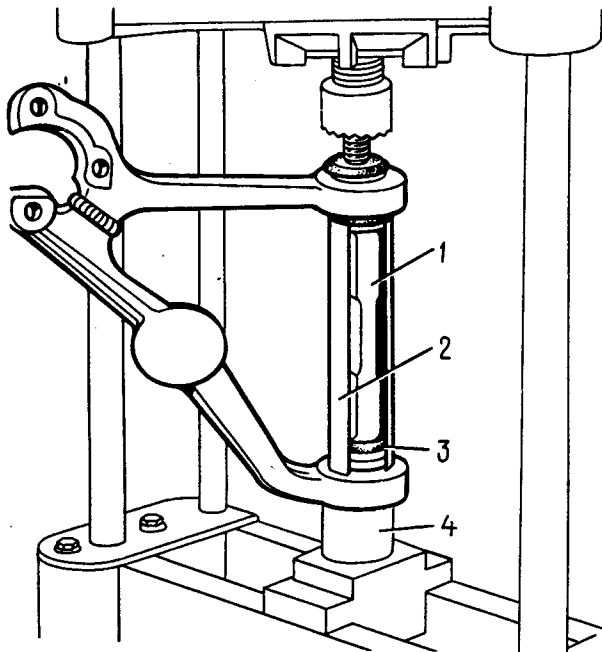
Pressing Out Upper Wishbone Silent Blocks:
